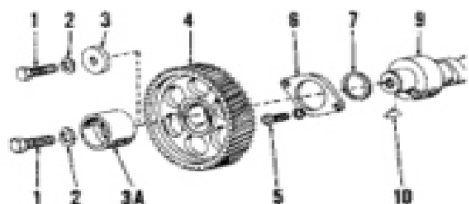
Drawing showing assembly of camshaft gear to camshaft. Flat washer (3) is used on diesel engines; fuel pump eccentric (3A) is used on gasoline engines.
